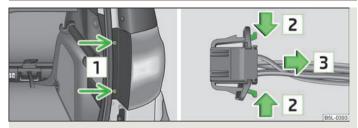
Removing the tail light assembly/disconnecting the plug connection
